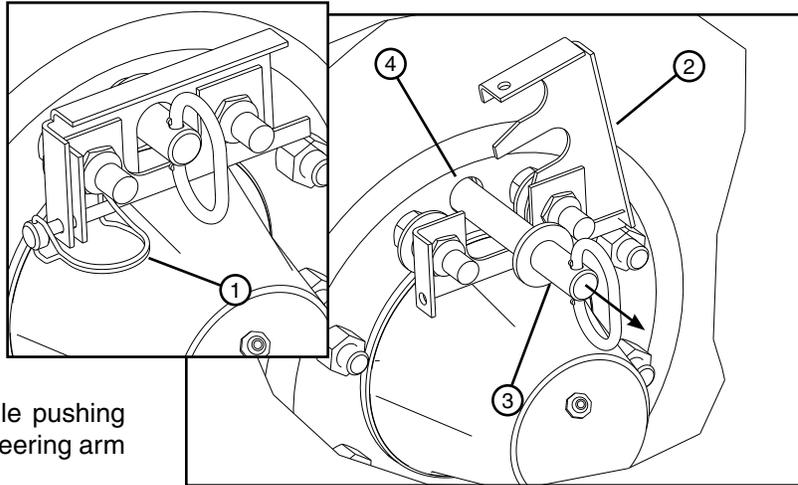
1. Lynch Pin 2. Retainer Clip 3. Torque Pin 4. Hub Torque Pin Receiver
